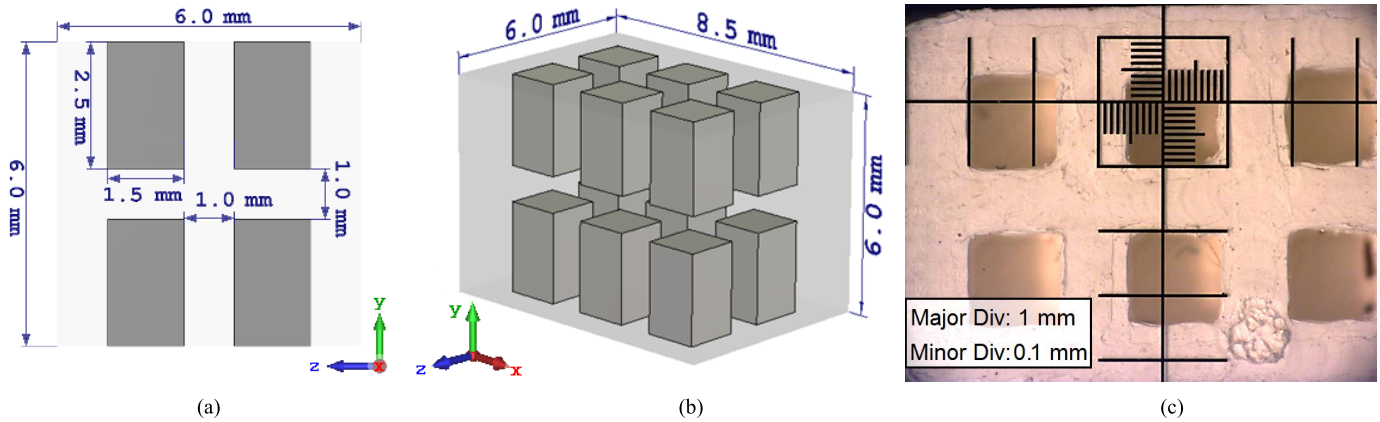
AEC schematic CAD models and microscope photograph. (a) Side view of AEC CAD model with dimensions. (b) Perspective view of AEC CAD model with dimensions. (c) Closeup microscope photograph of a manufactured AEC with an overlaid glass slide for measuring the dimensions.
